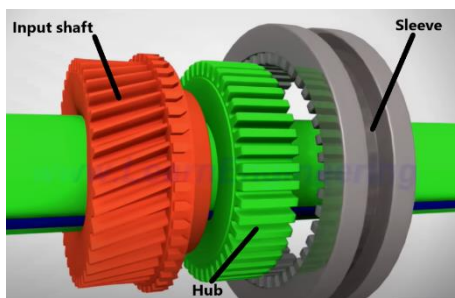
Manual transmission input shaft, hub, sleeve assembly [1]
